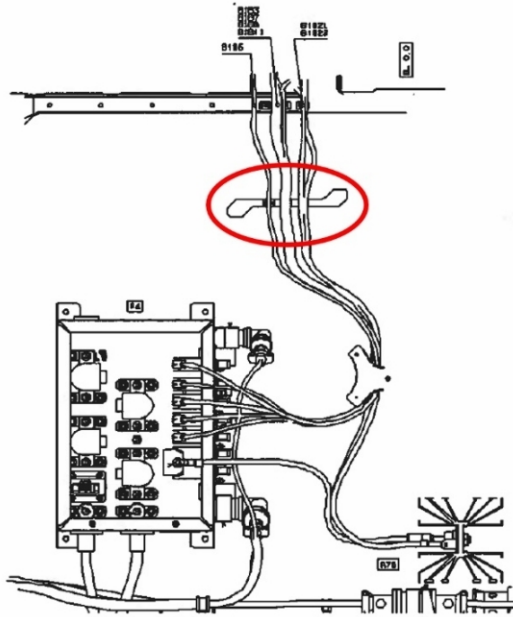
A detail excerpt from the Completion and Finishing of Power C/A Card showing the power cable routing under the right strip assembly. (Courtesy of Leonardo Helicopters, modified by NTSB)
